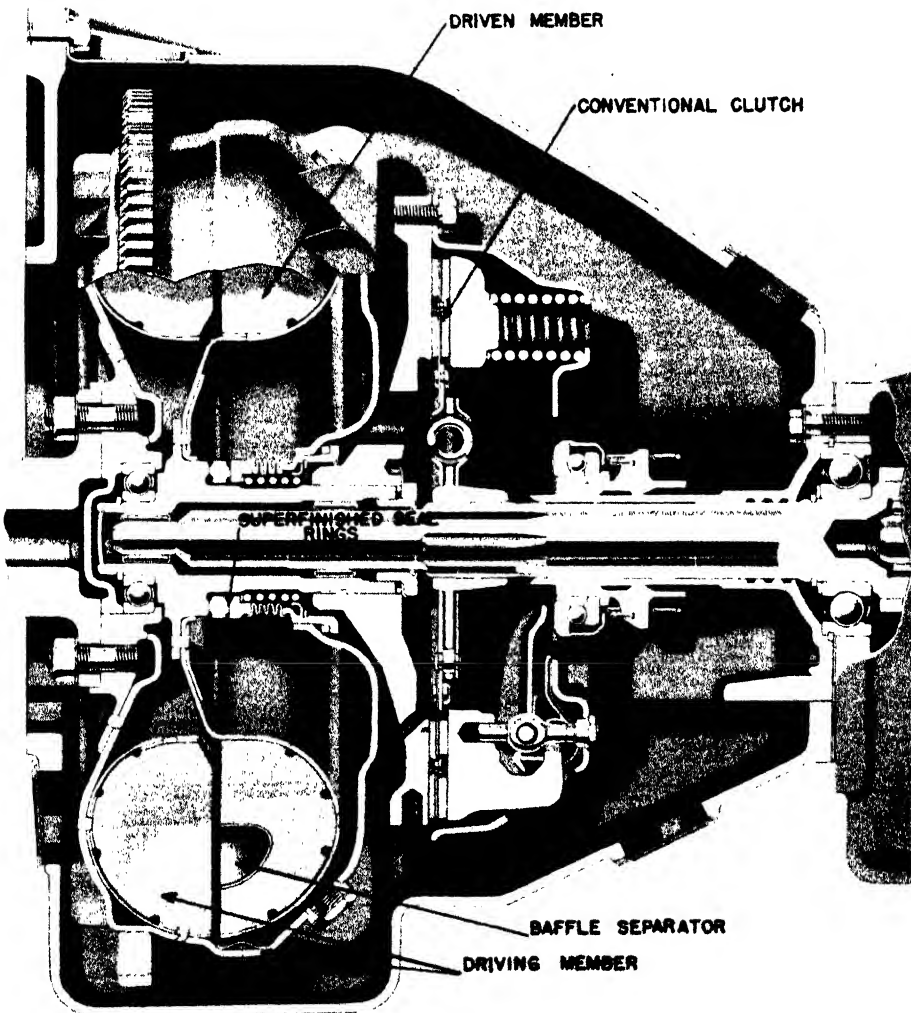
HYDRAULIC COUPLING (FLUID DRIVE). (Courtesy, Chrysler Corporation.)
